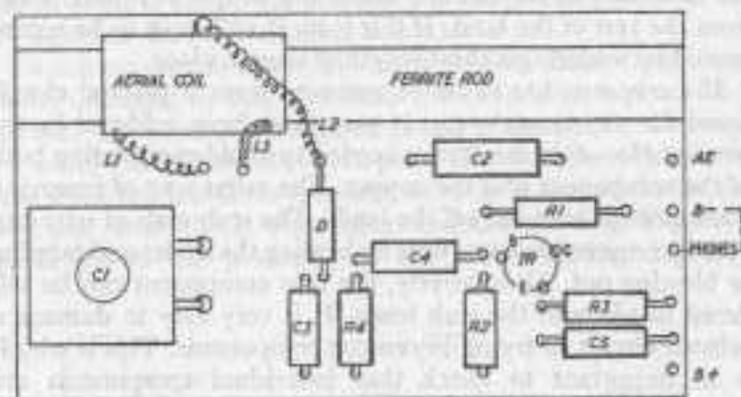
COMPONENT LAYOUT FOR DESIGN NO. 4 (CIRCUIT DIAGRAM, FIG. 30) FOR PRINTED CIRCUIT ASSEMBLY.
